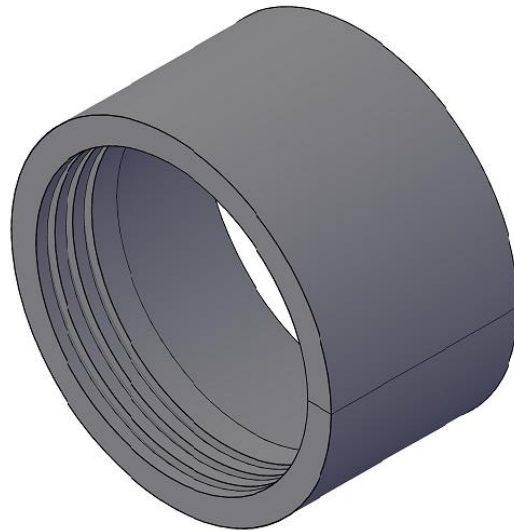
Model I : Exposed electrode placement assembly (Isometric view)
